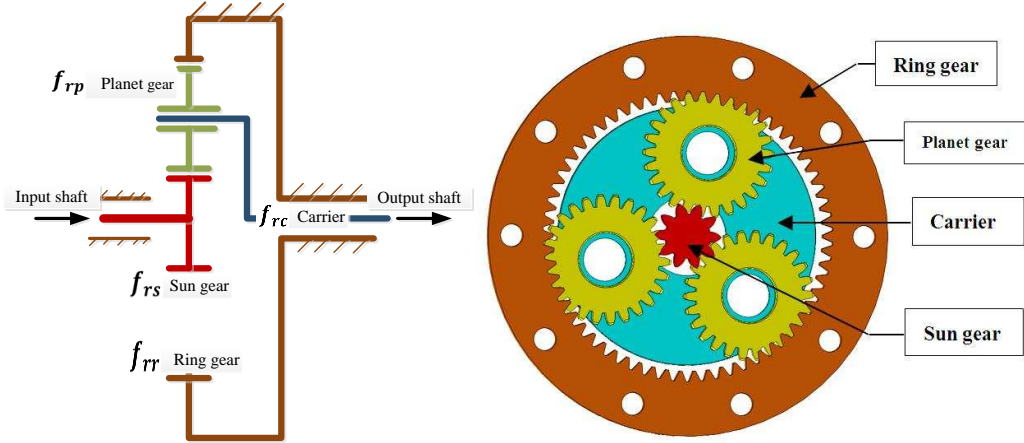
Schematic of a planetary gearbox with the standstill ring gear
